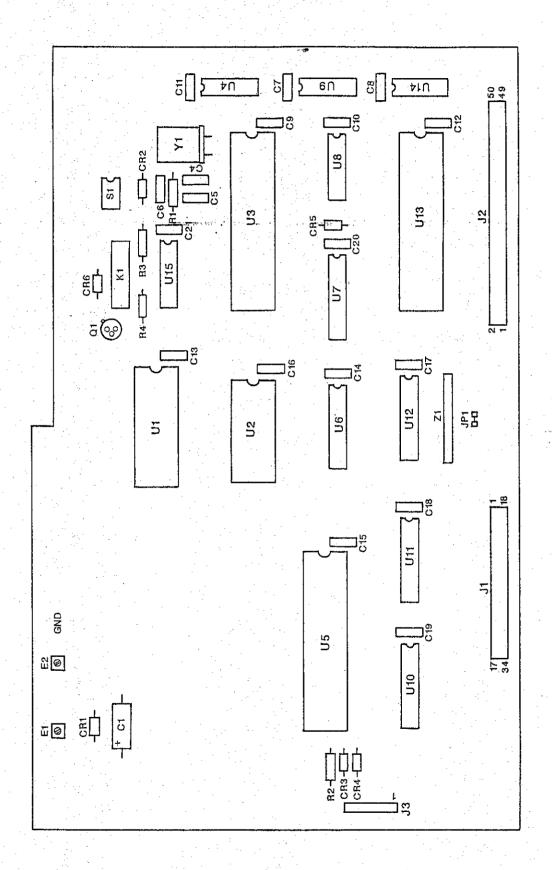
IEEE Interface Circuit Card Assembly A4A1, Parts Location Diagram
